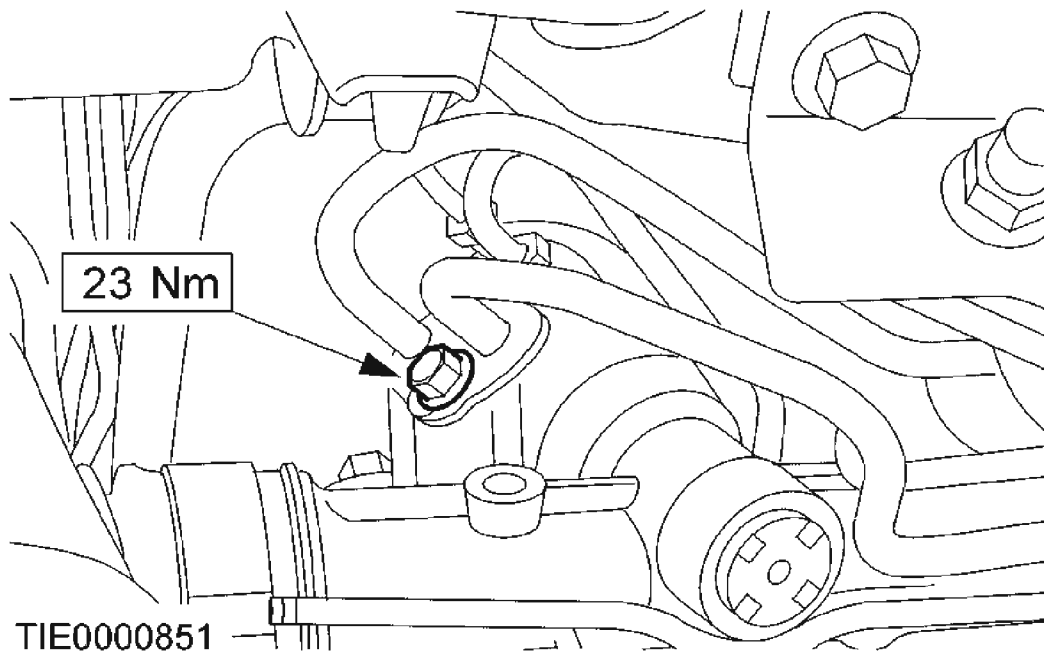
Connecting Power Steering Lines To Power Steering Gear
